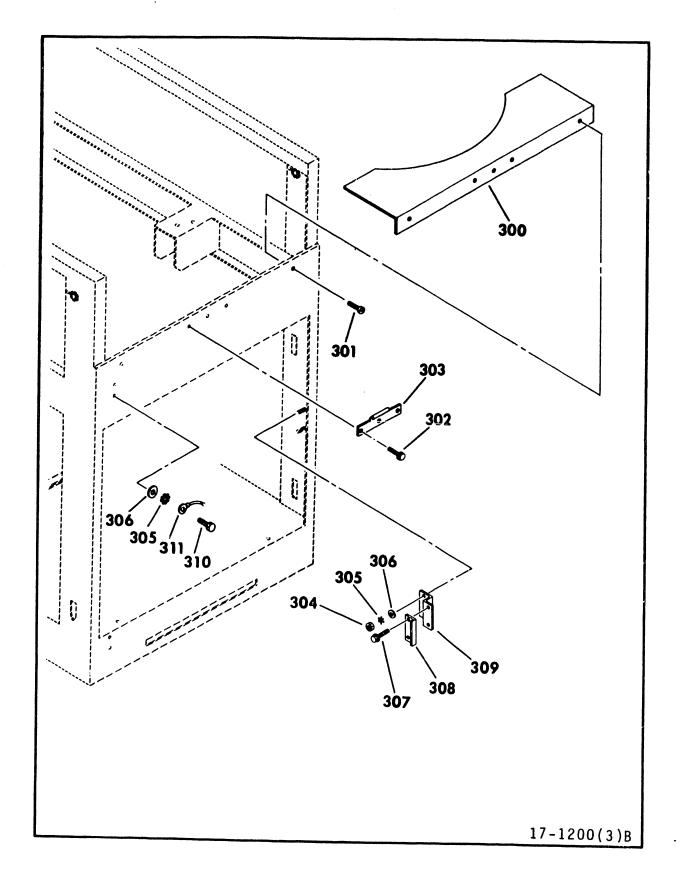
A-12. Frame & Air Assembly (Sheet 3)
